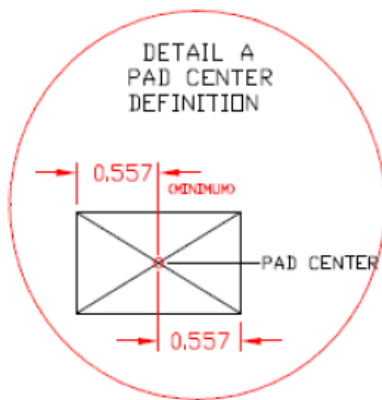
Host Board Required PCB Layout Pattern: To Pad Center Edge Relative to Origin
